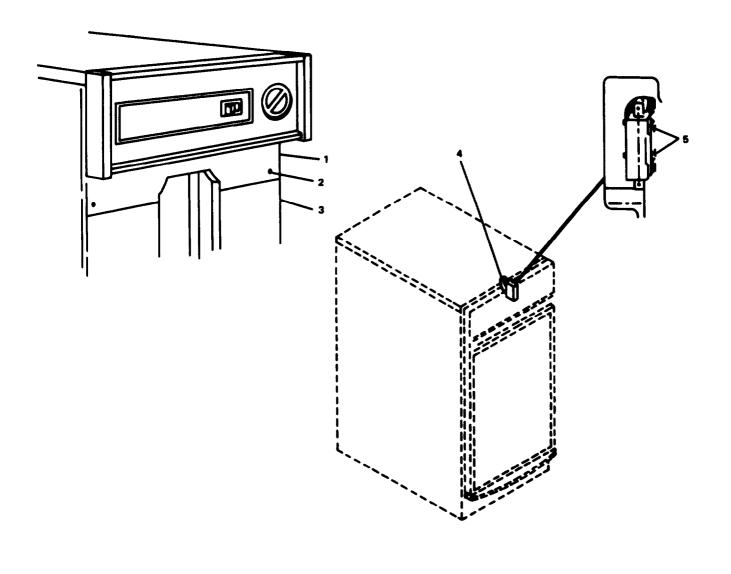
Solid Waste Compactor (Sheet 1 of 2.
